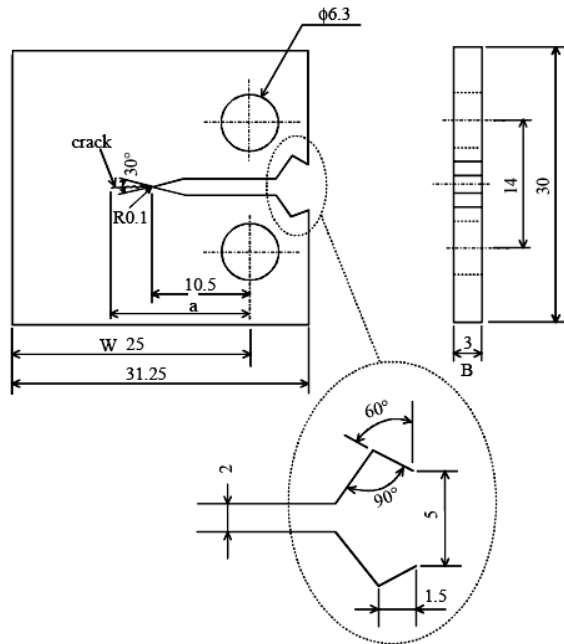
Shape of fracture toughness specimen (1/2 CT)
